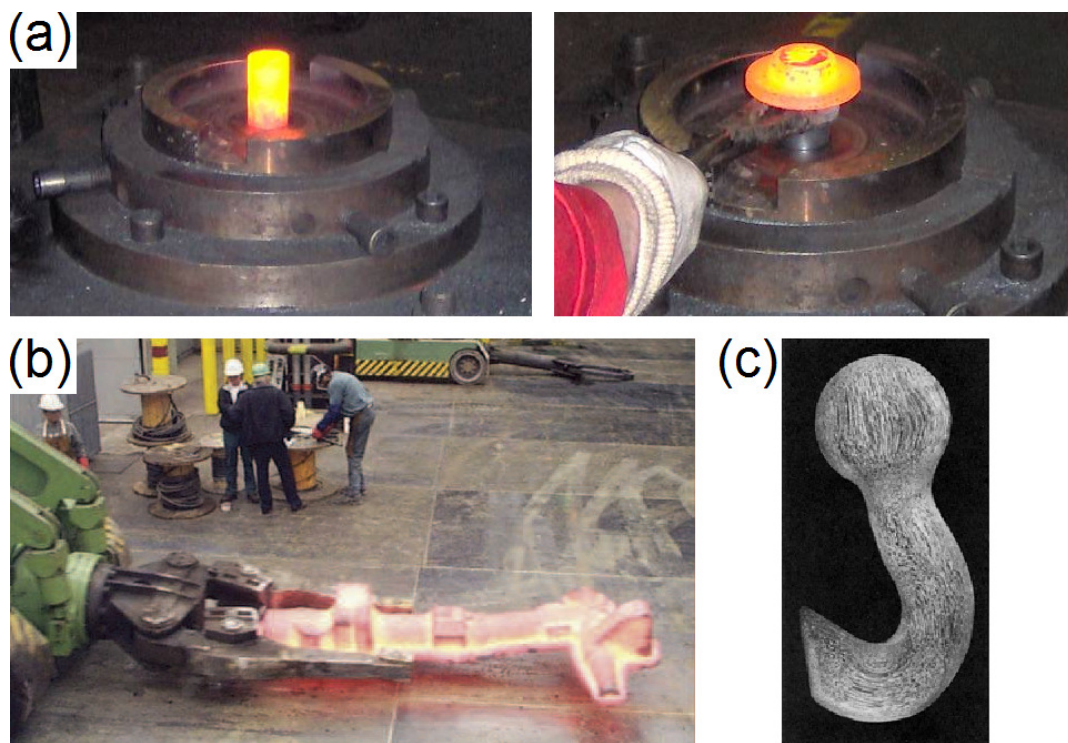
Forging examples: (a) forging process in action [14]; (b) landing gear forging [9]; (c) forged microstructure [15].
